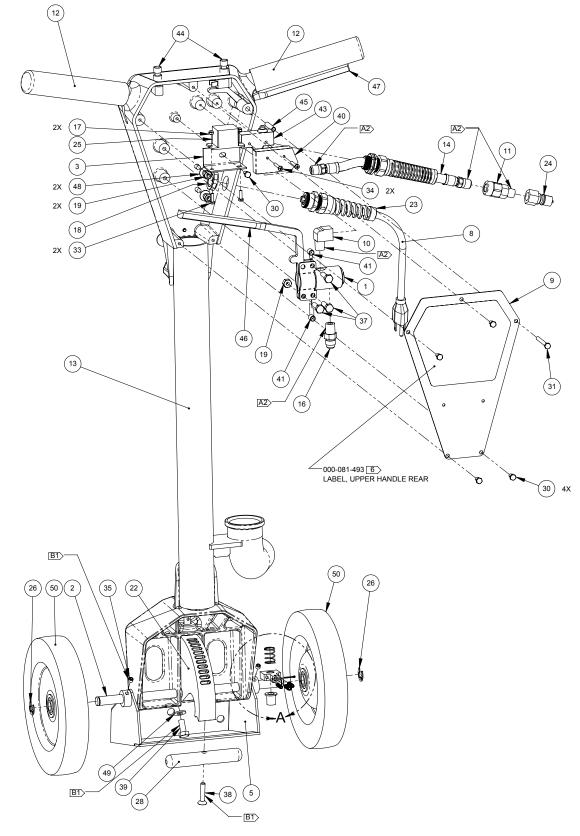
Upper and Lower Handle Assembly - View 3 of 3 604-051-107 Rev. B
